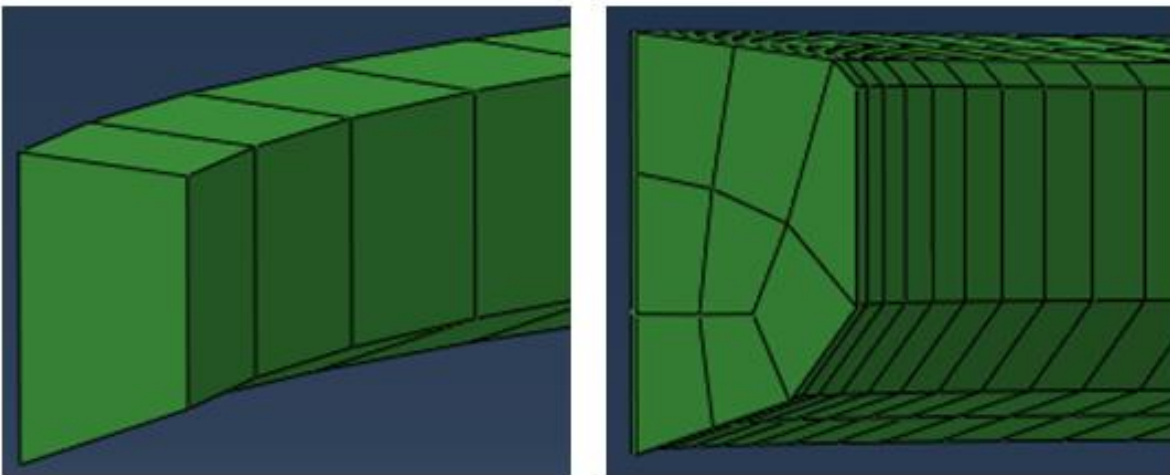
Defeated thread mesh (left) and full featured thread mesh (right).
